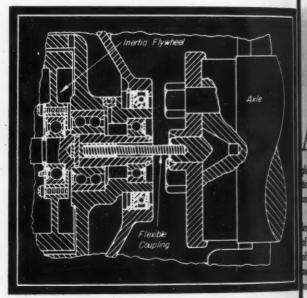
Above—A flexible coupling drives this rotar inertia device used to control sliding railway wheels
